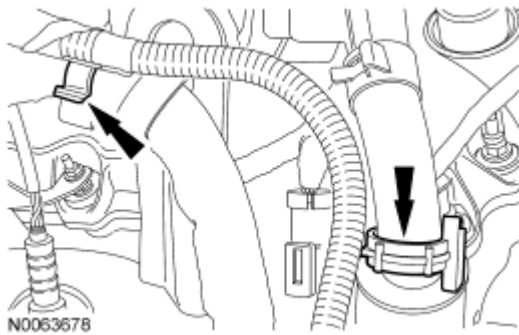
Identifying Block Heater Wiring Harness From Engine
